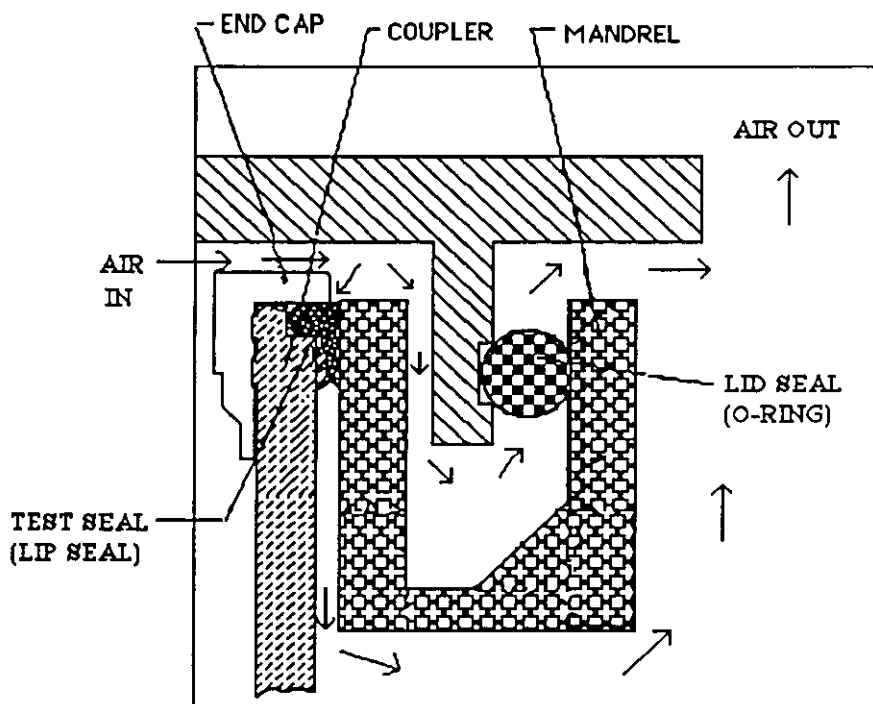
Cross-sectional view of the seal and coupler assembly used in Wavin equipment (View X-X of Figure 6.5)
